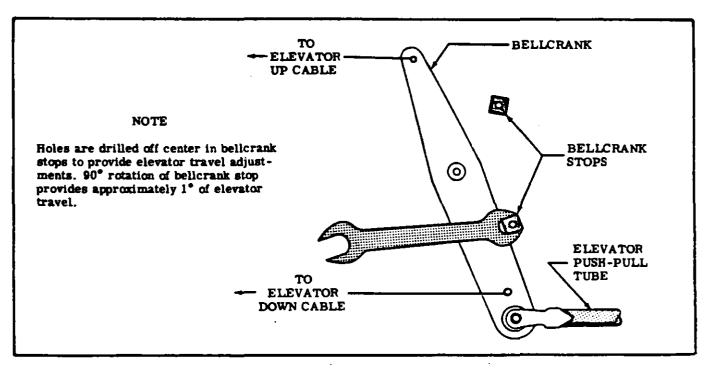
Elevator Bellcrank Travel Stop Adjustment
